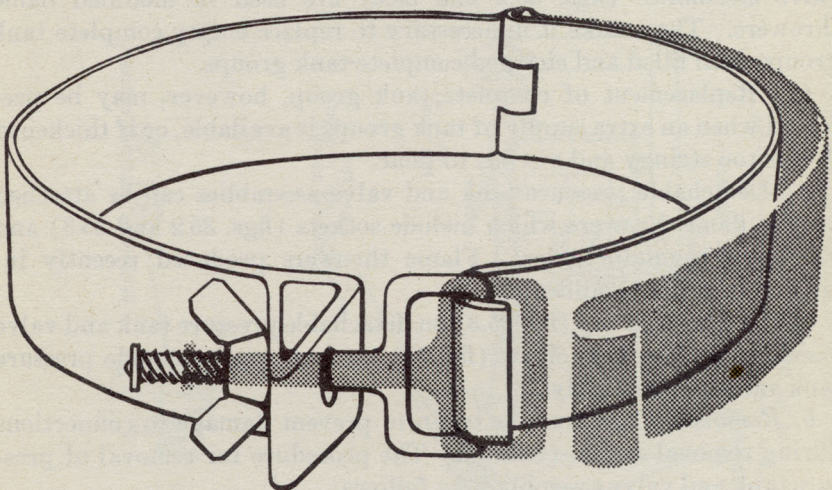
(Added.) Adjustable pressure tank clamp, showing use of nut and screw tightening device.
